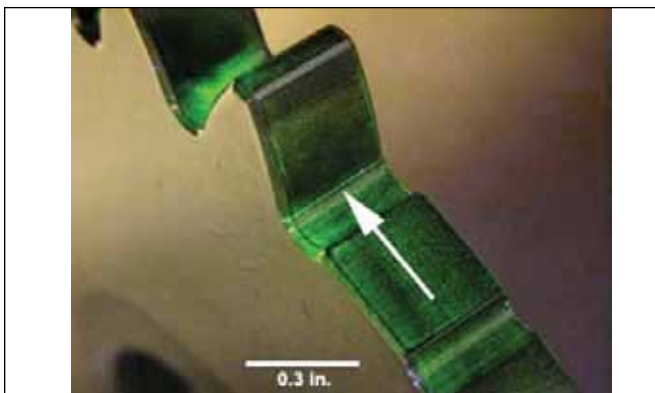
Cracked STBF test gear tooth showing MPI crack indication.
